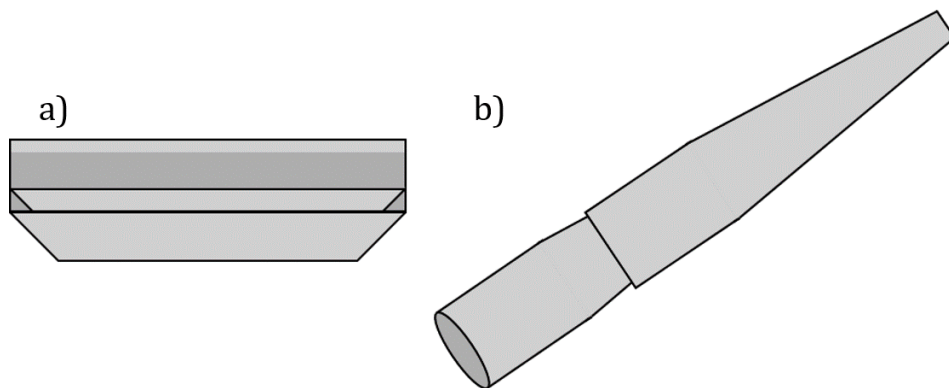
The two compound tools were pre-assembled ahead of each trial (author's own illustration): a) shows boat-to-boat; and b) shows cone-to-cone
